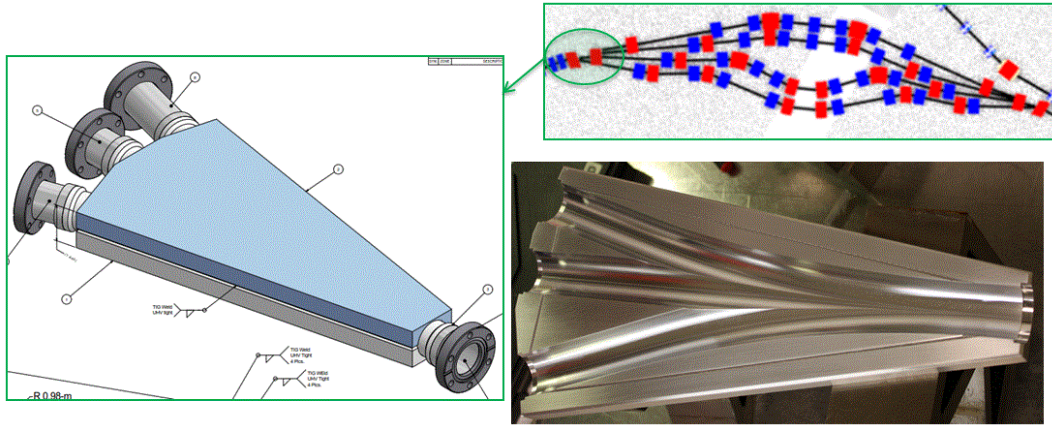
Example design for beam splitting and combining chamber, by welding two machined aluminum halves with smooth beam path transitions.
